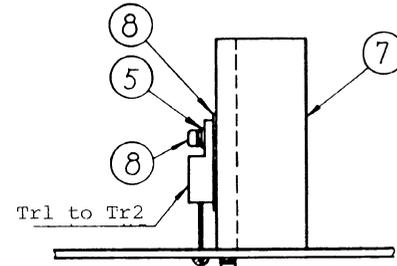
HLP5-2 Circuit Board Assembly (LY-43361-2) (for USA) 2/2
